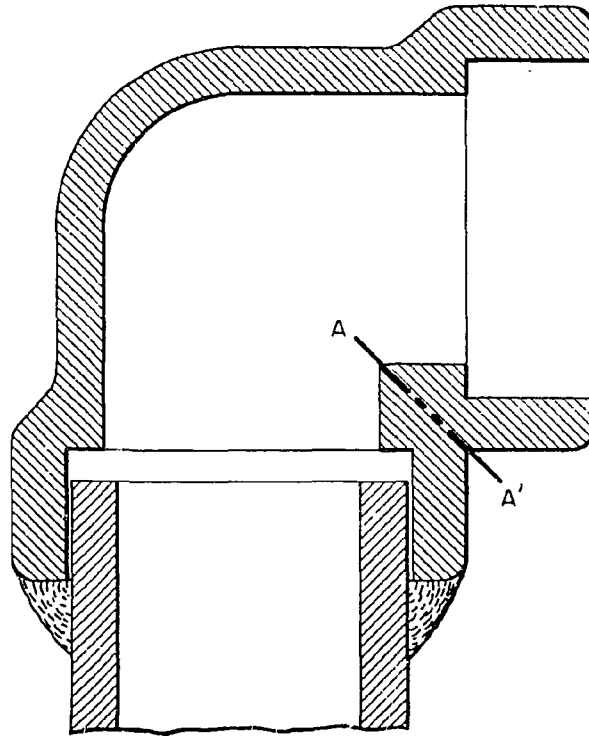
B16.11 socket-welding 90° elbow showing section AA', the probable critical section for evaluation of ΔT_1 and ΔT_2 of such a fitting body.
